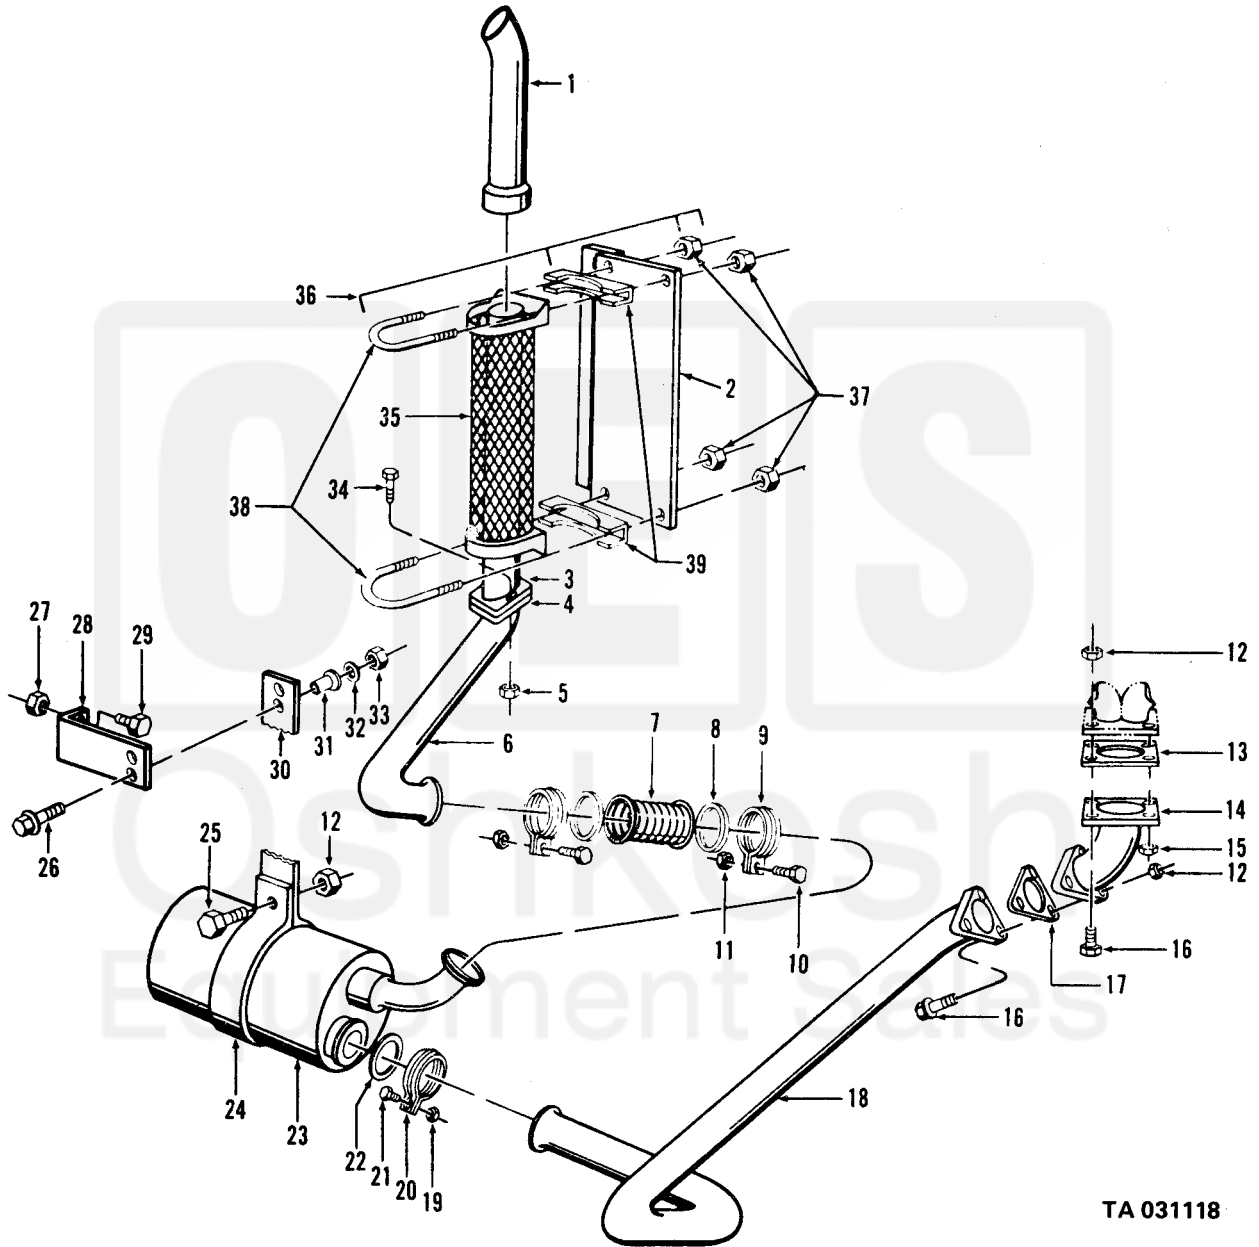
Engine exhaust pipes and stack pipe mounting (multifuel).
